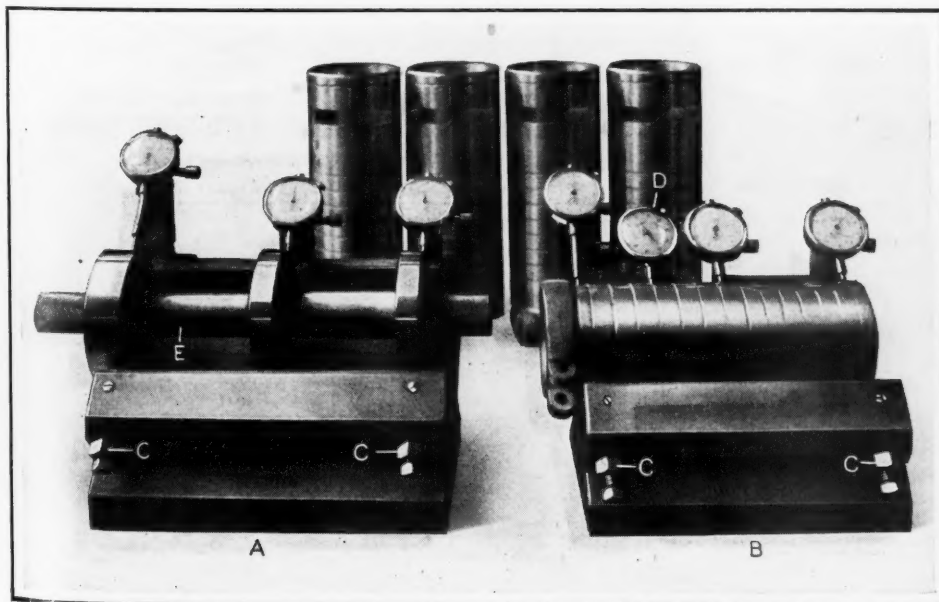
(A) Setting the Indicators of an Inspection Fixture for Checking a Given Size of Valve Sleeve; (B) Method of Inspecting Valve Sleeve
